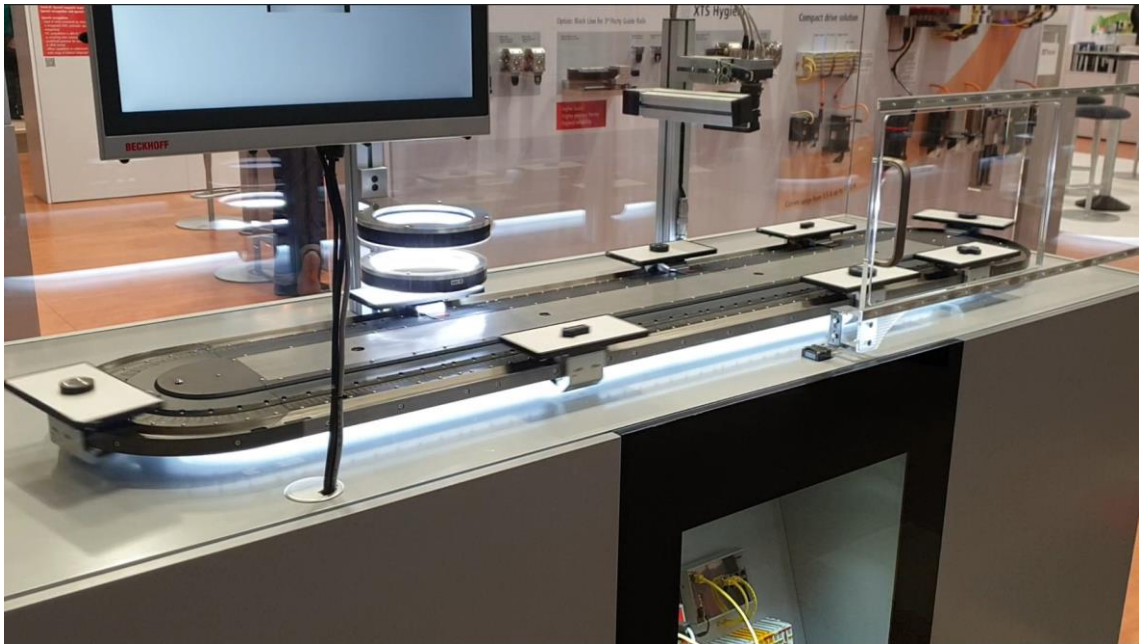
Beckhoff XTS moving parts for visual inspection in Teknologia 2019 Helsinki.
